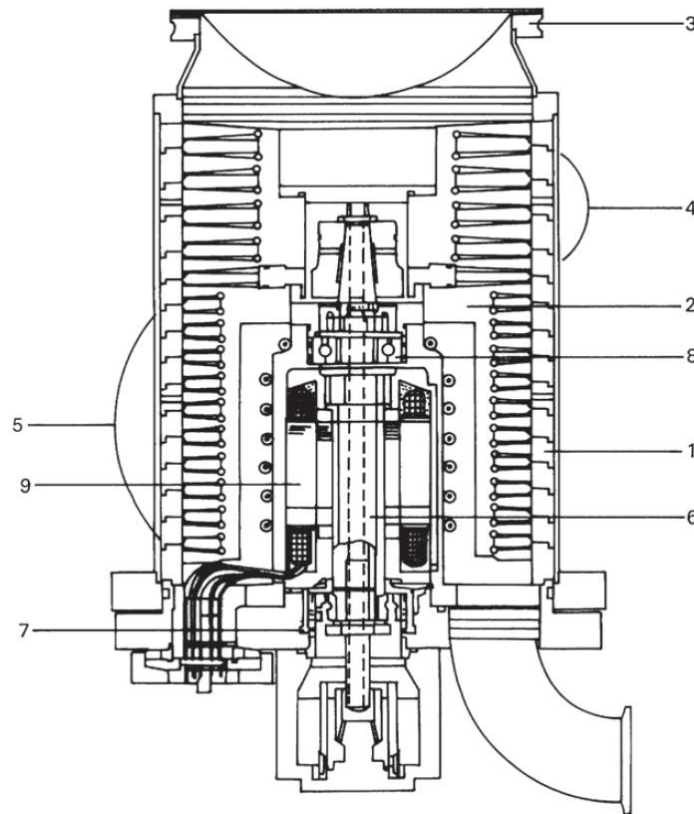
Cross-sectional picture of a Turbomolecular pump of a single-ended axial flow design: 1, stator blades; 2, rotor body; 3, intake flange; 4, blades of the suction stage; 5, blades of the compression stage; 6, drive shaft; 7 and 8, ball bearings; 9, high-frequency motor⁹⁴.
